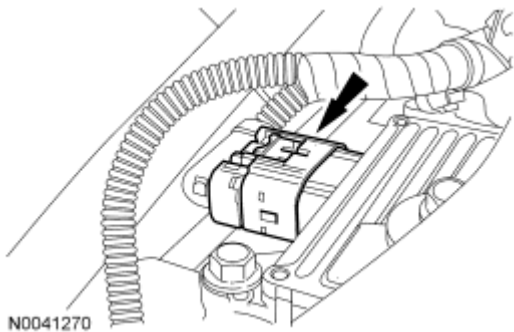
Locating Transmission Control Module (TCM) Electrical Connector
